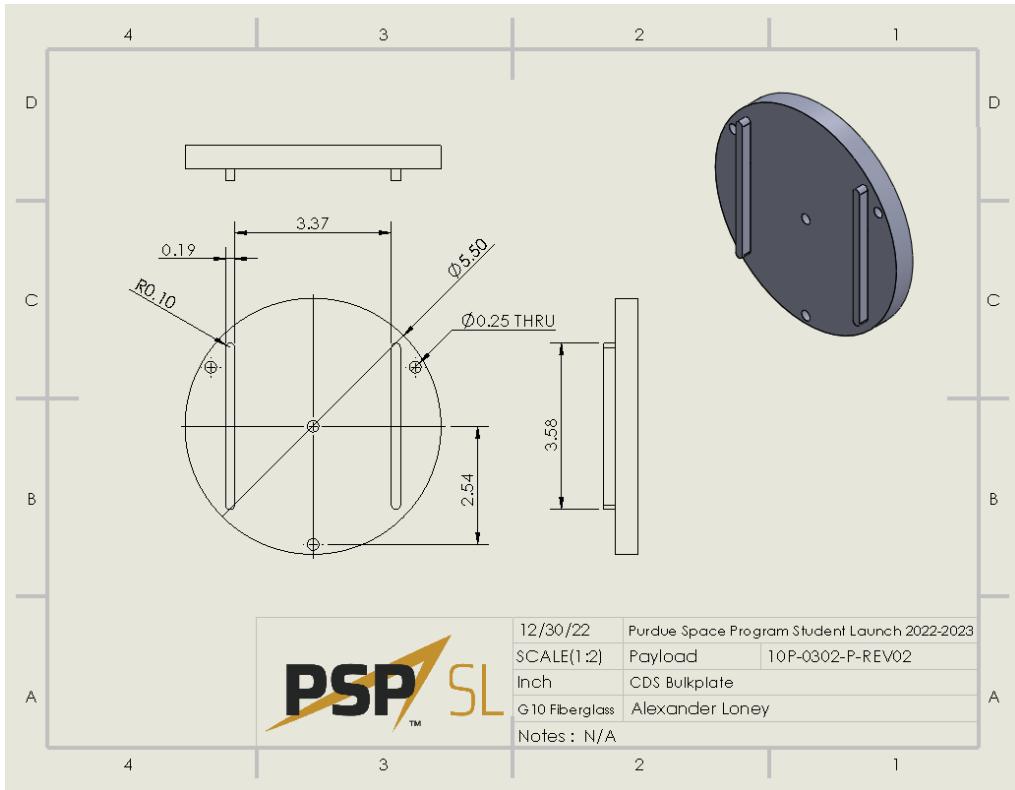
CDS Bulk Plate Technical Drawing
